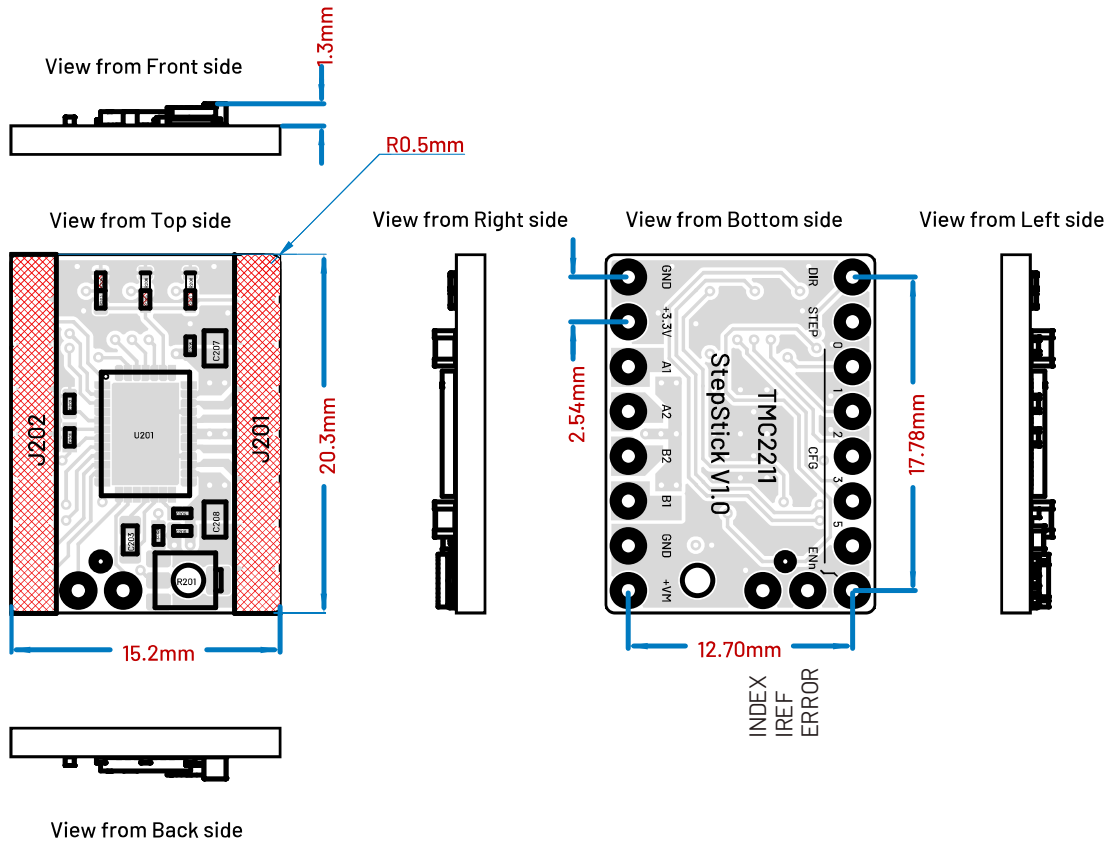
TMC2211STEPSTICK Component Placement—Top, Bottom, and Sides Including Dimensions
